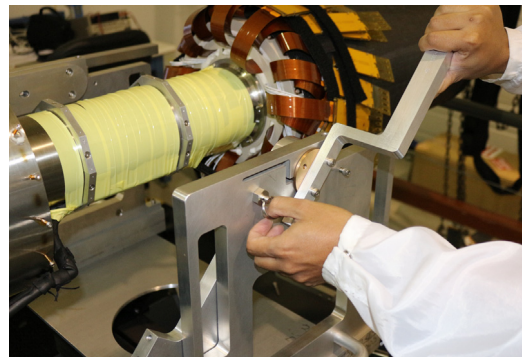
Rotating the assembled barrel to the horizontal position with the transition fixture. The safety lock is being released to secure the barrel.
